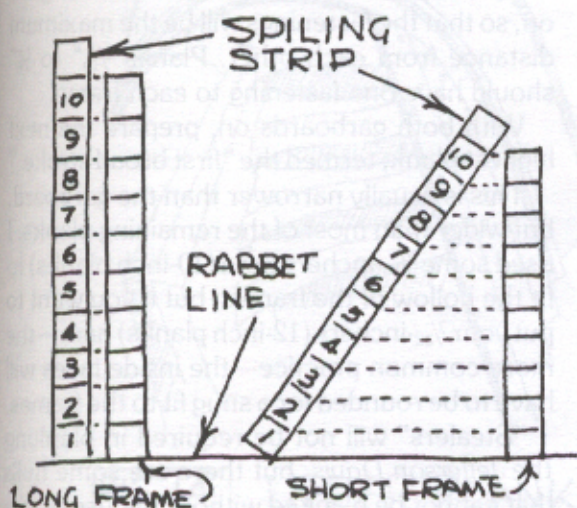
SPILING STRIP TO LAY OUT PLANK TAPERS
